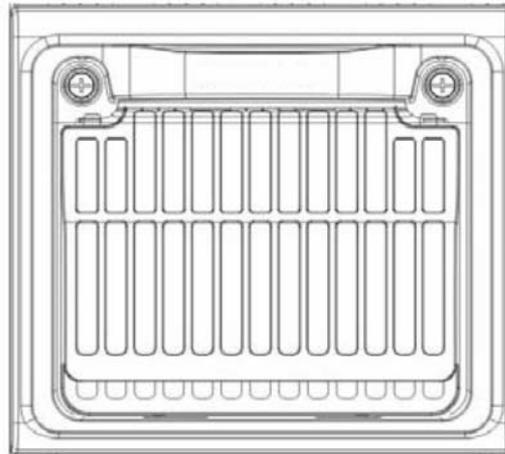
DG-SA-RPS-7010AC Front Panel view
